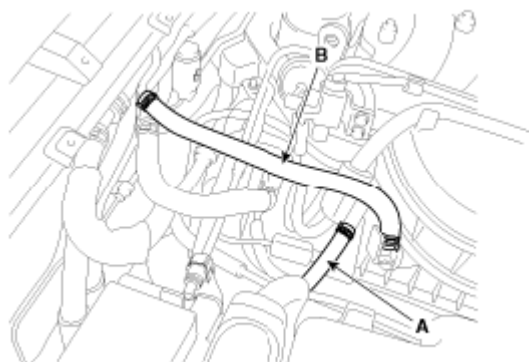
Identifying Purge Control Solenoid Valve Hose & Brake Booster Vacuum Hose
